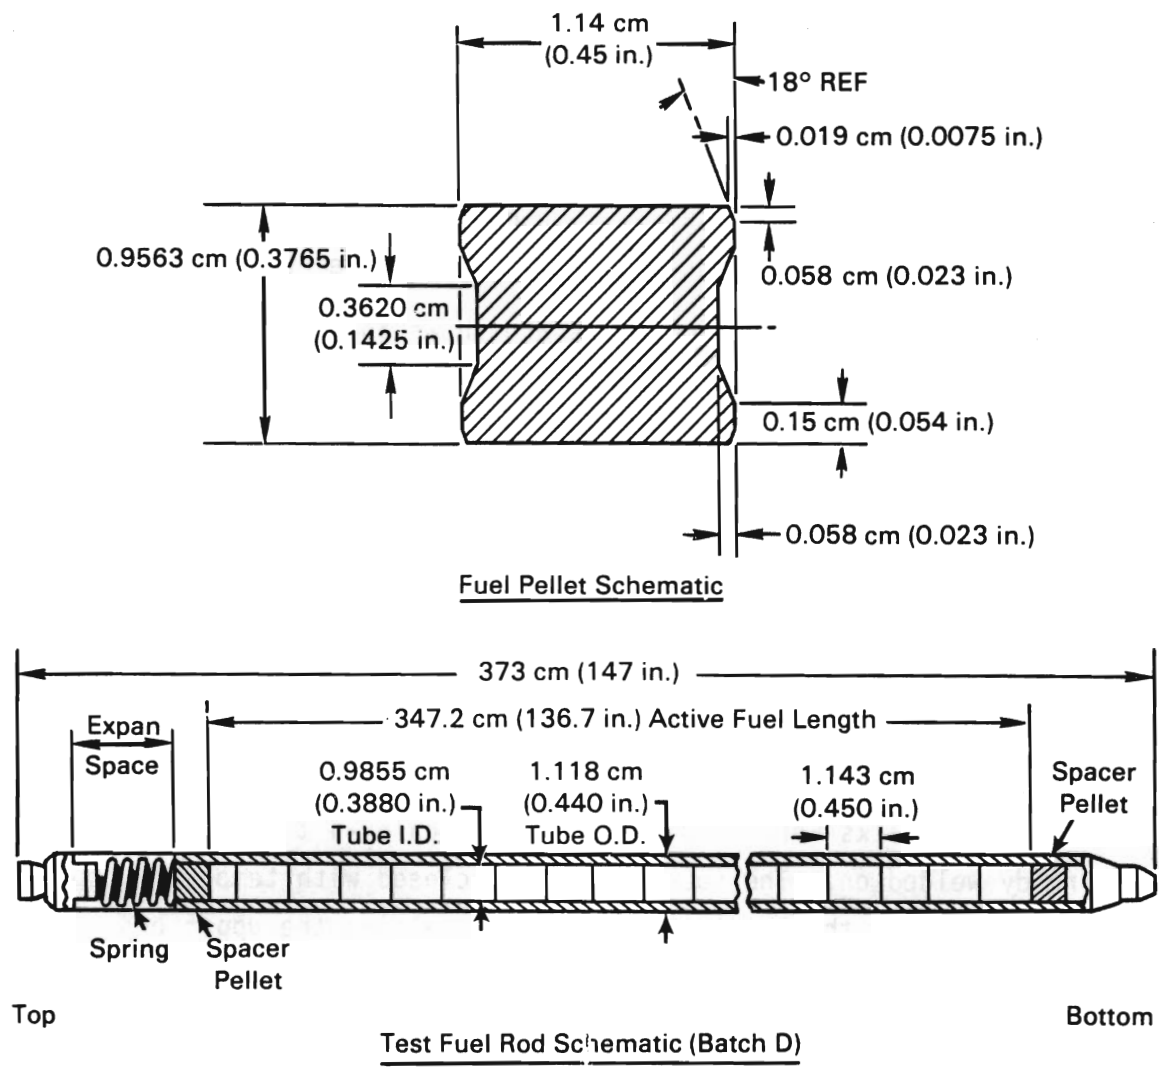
ATM-103 Pellet and Fuel Rod Dimensions
